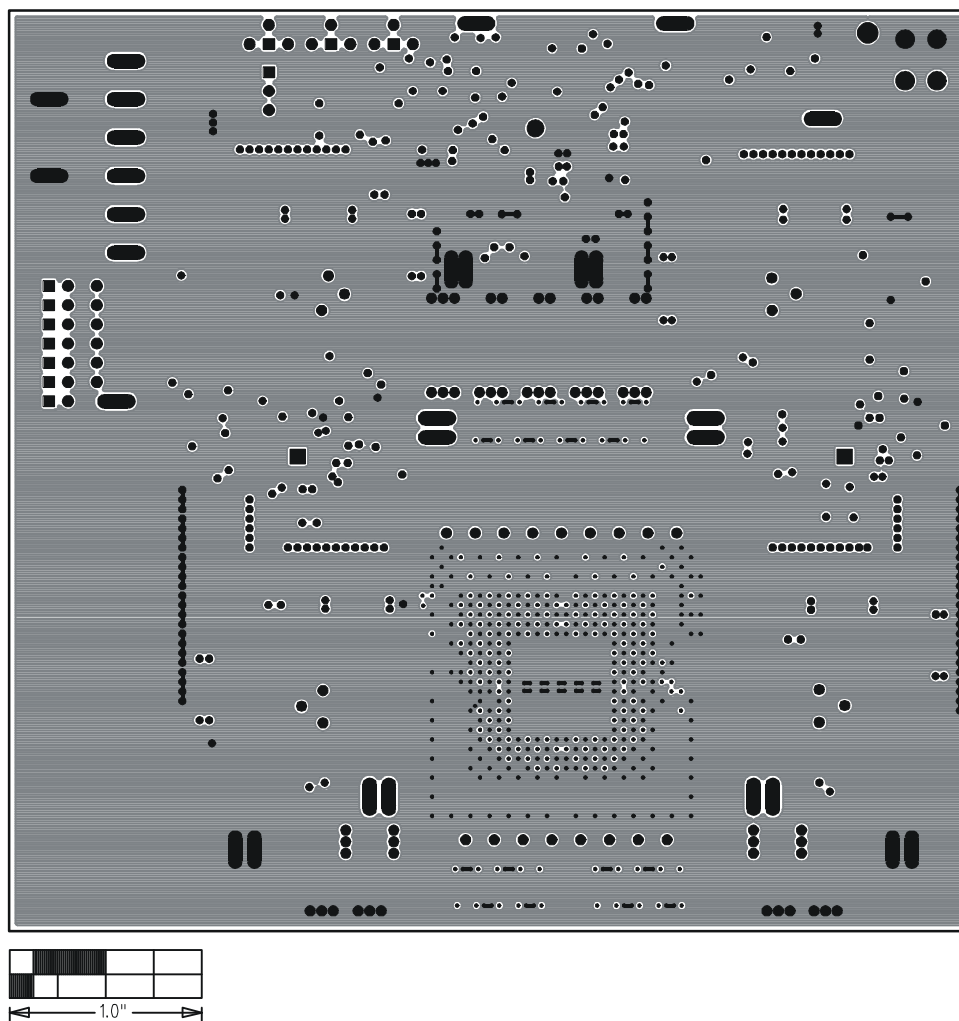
MAX1544/MAX1545 EV Kit PC Board Layout – GND Layer 2
